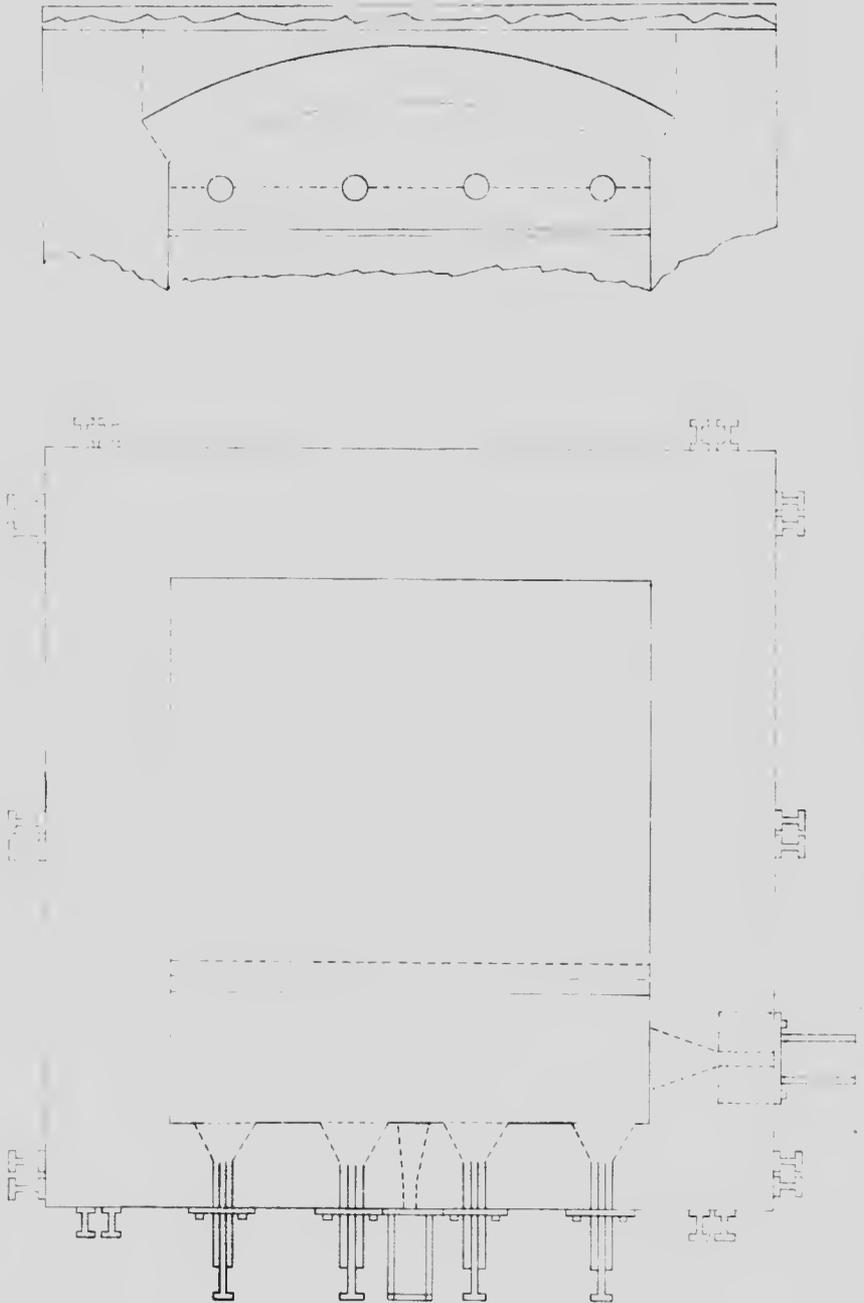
Anderson oil burning copper I last furnace. Plan and elevation of hearth.
